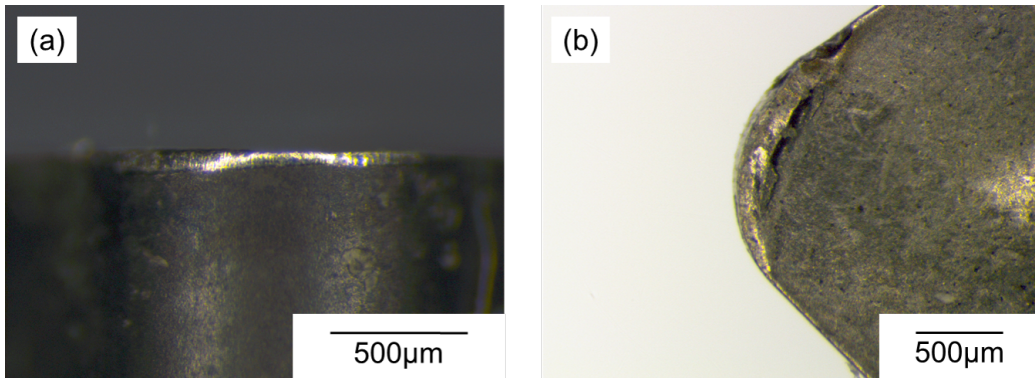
Microscope images showing the degree of tool wear after trial prep 2 on billet 4.1. Showing (a) the flank face and (b) the rake face.
